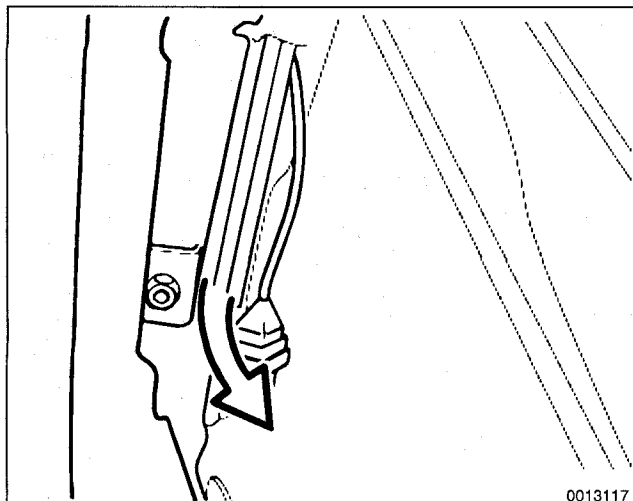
4-door cars: Remove lower retaining bolt at base of window rear guide rail and pivot rail out of door.
